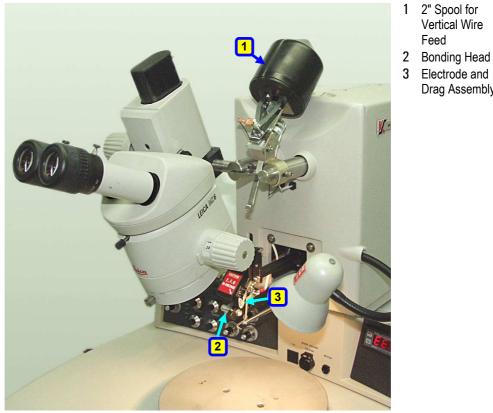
shows the main head assembly of Models 4522 and 4524.
